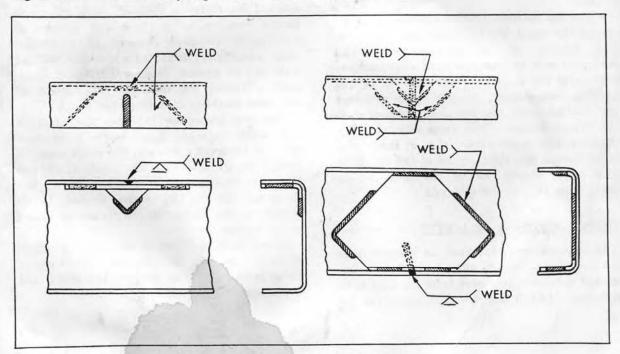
Method of Attaching Reinforcement in Frame Side Rails
